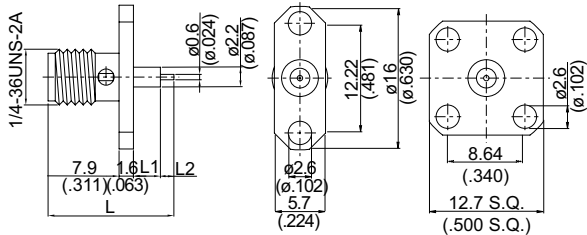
2-hole flange Fig. 3-2: square flange
